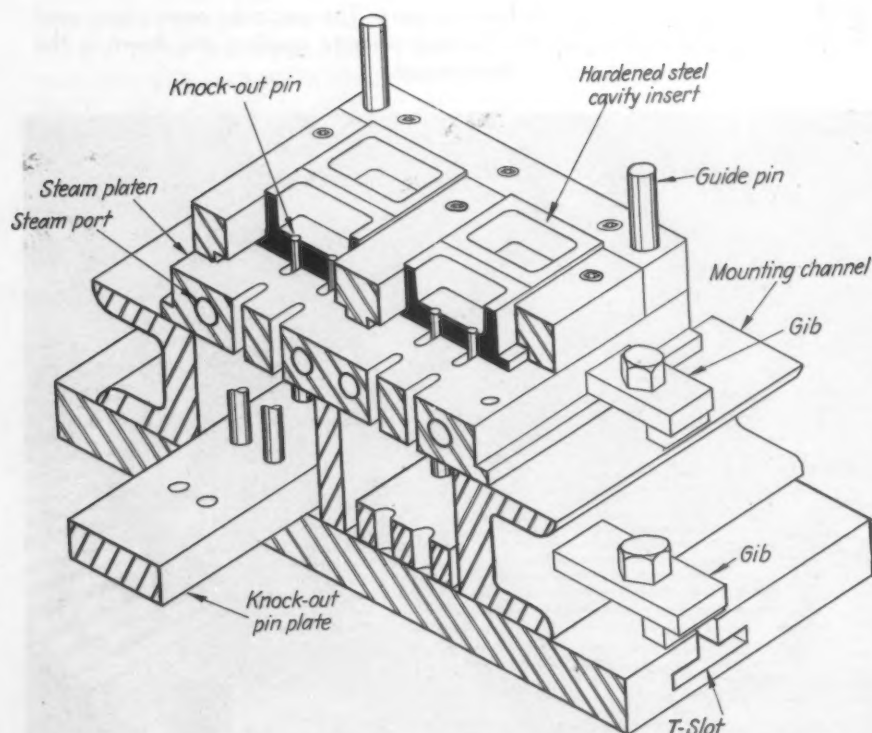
Sectional view of a multiple cavity mold for compression molding.
